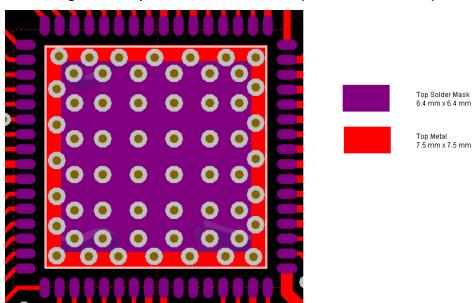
Top Metal and Solder Mask (Reduced Mask Area)
